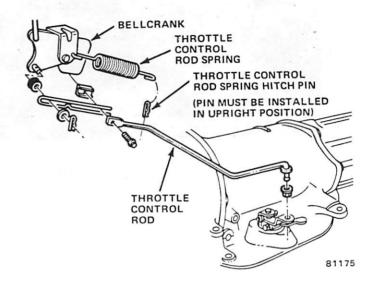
C-31 Throttle Control Assembly—Six-Cylinder Engine
